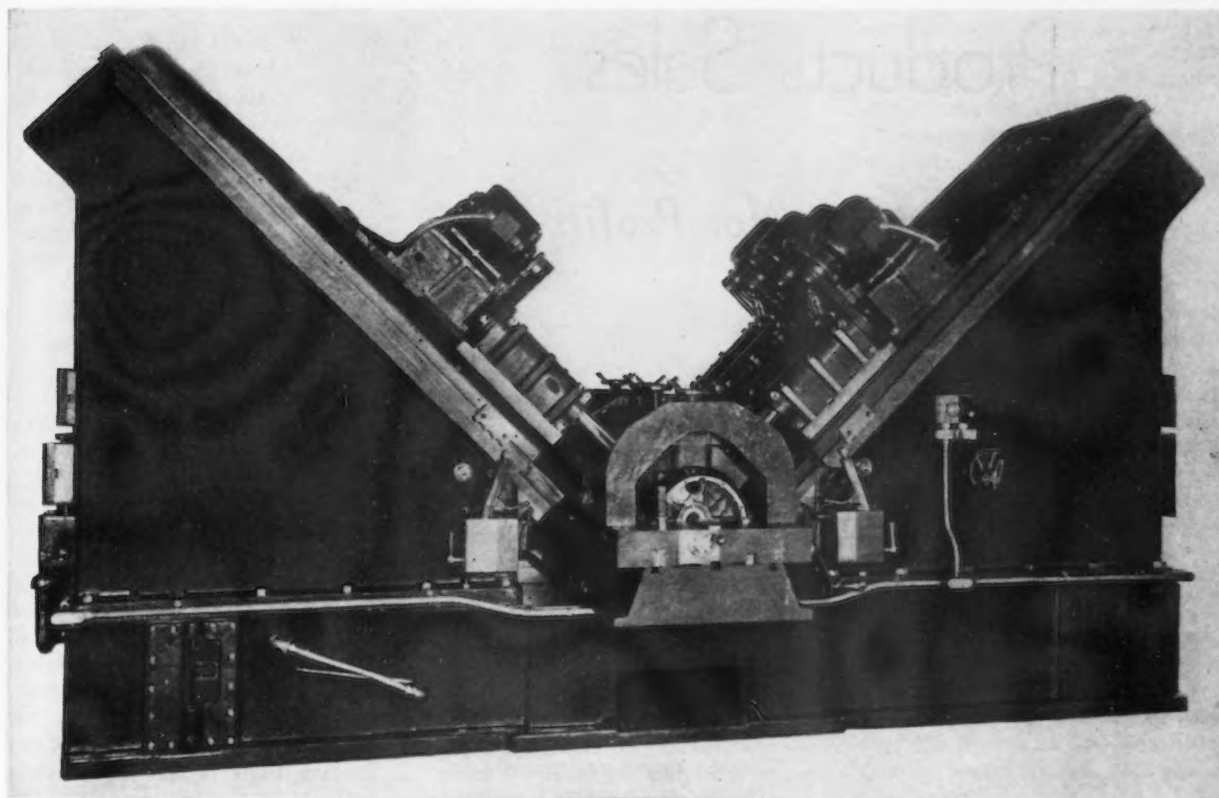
Front view of eight-spindle, cylinder-block boring machine. • • •
